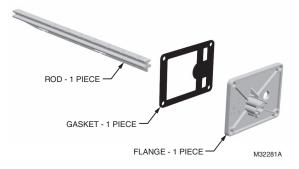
Duct Mounting Kit (Part No. 50053060-001).
